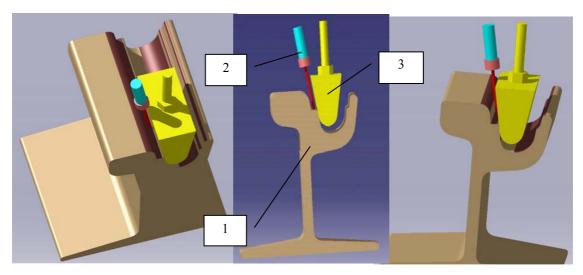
Position welding torch and copper patina inside the rail channel 1 - Rail, 2 - Welding torch, 3 - Copper guide track
